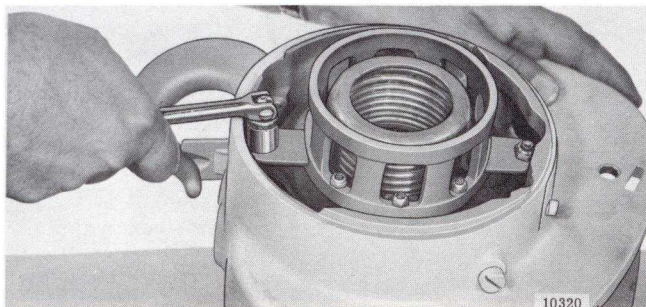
Removing Self-locking Nuts Securing Spring Plunger to Brake Plate Pins
